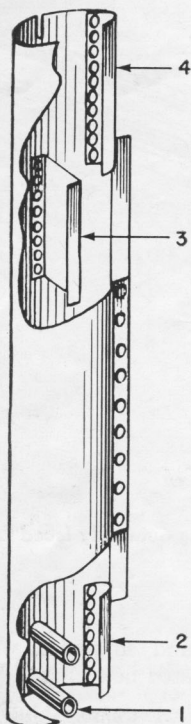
Wing-float strut assembly: (1) spacer tube for the attachment of bolts at the float; (2) contour plate for the float socket; (3) internal reinforcing channel; (4) contour plate for the wing socket.
